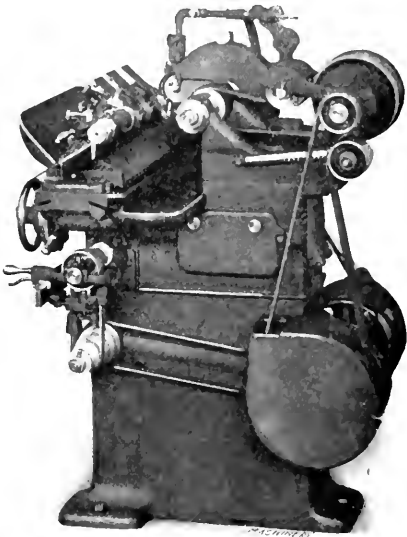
Right-hand End of Norton Plain Grinding Machine
